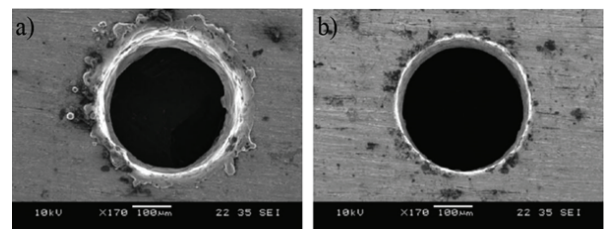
| SEM image of produced dimple by abrasive jet machining and laser machining (Reconstructed from Wakuda, M., et al., 2003)
